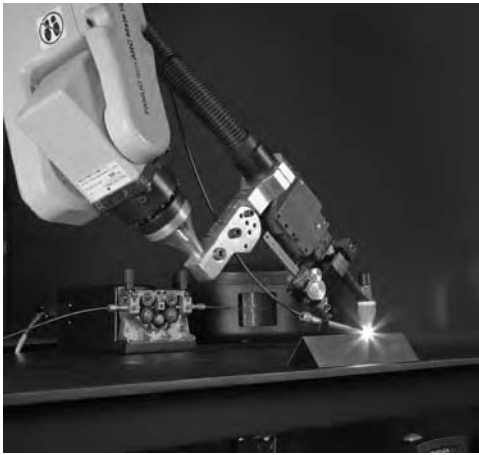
Robotic welding. Note wire feed device supplying “cold” wire. Courtesy of The Lincoln Electric Company
